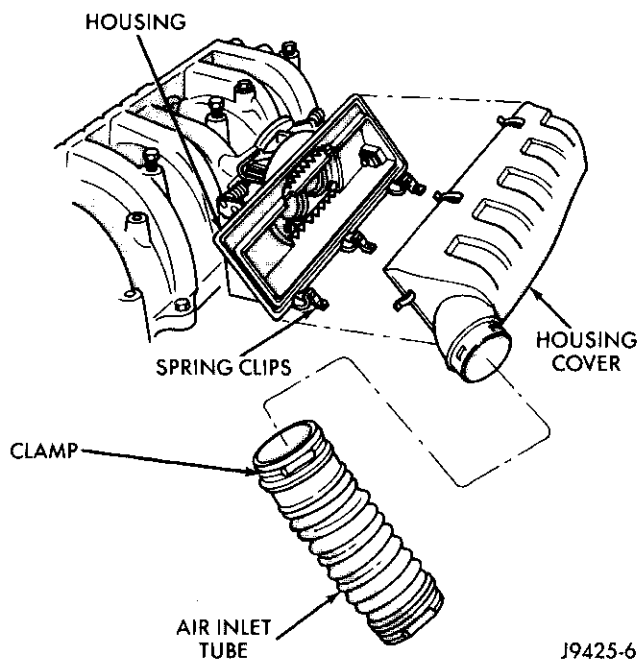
Air Cleaner Housing—8.0L V-10 Engine
